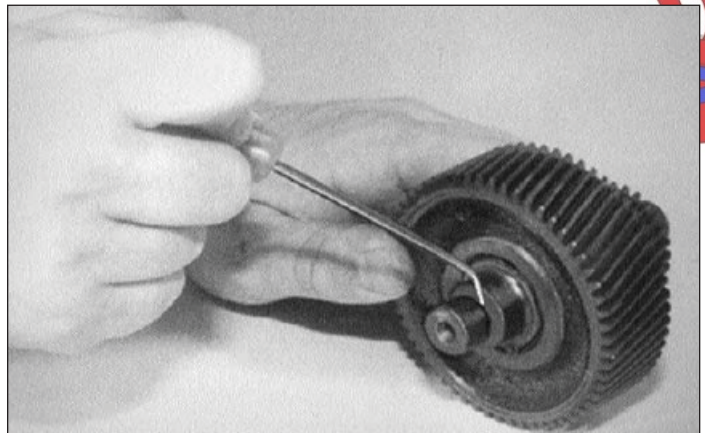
Removing O-rings from Intermediate Shaft & Gear
